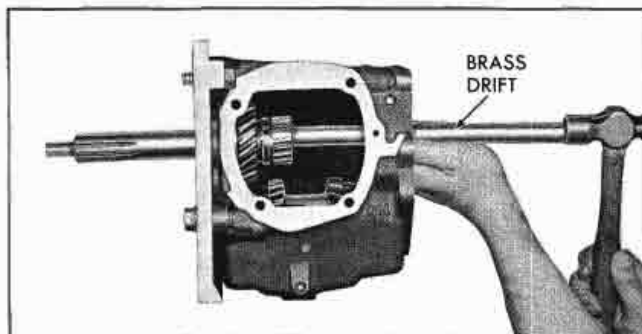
Installation of Main Drive (Clutch) Gear Assembly
